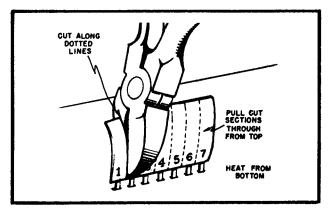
Vertically mounted printed-circuit boards can be removed in sections, if necessary.
